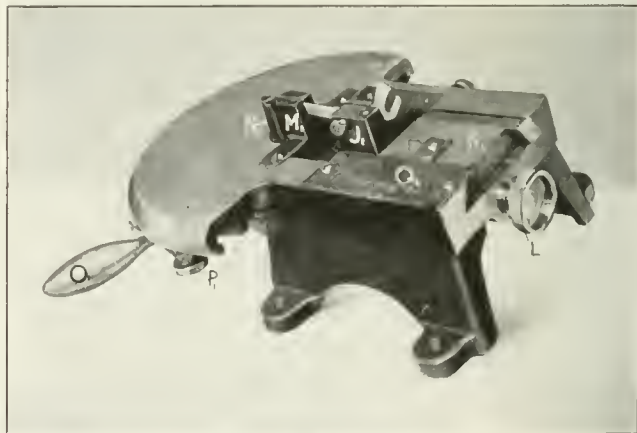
Adjustable Die for Making the First Bend in the Cam Lever
